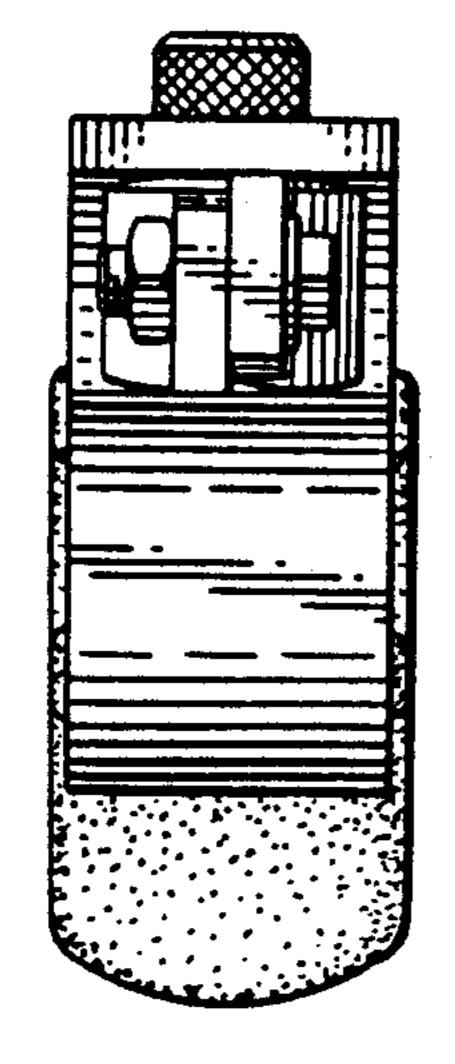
is a side elevation view of the fender trim tool as seen from the right in FIG. 2; and
